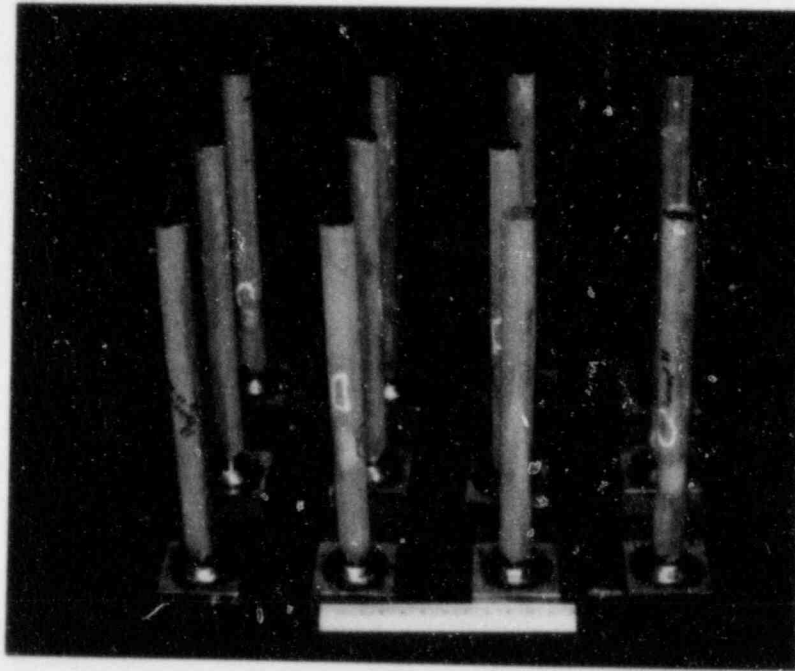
Typical Appearance of Welded Test Specimens.
